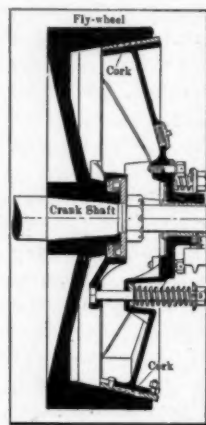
Section of a flywheel and a cone clutch, showing the application of cork inserts in conjunction with a leather facing
